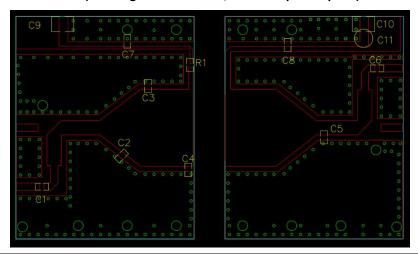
Test Circuit Component Layout (PCB Roger 4350B 30Mil, PCB file upon request)
